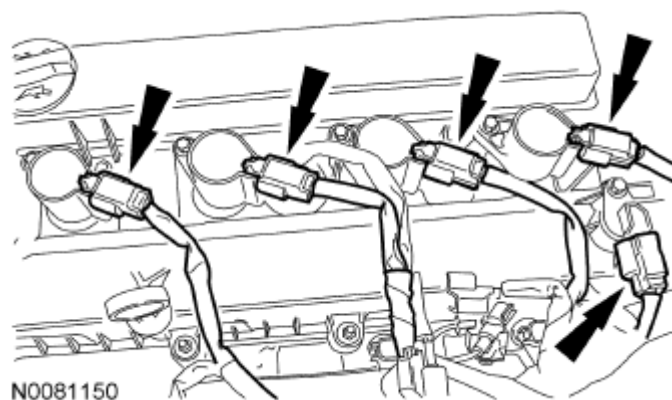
Locating Coil-On-Plugs And Camshaft Position Sensor Electrical Connectors
